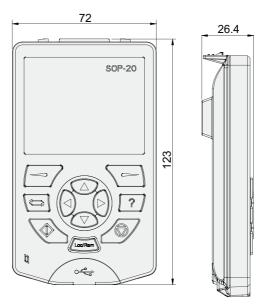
Dimensions of SOP-20-880 (unit: mm)
